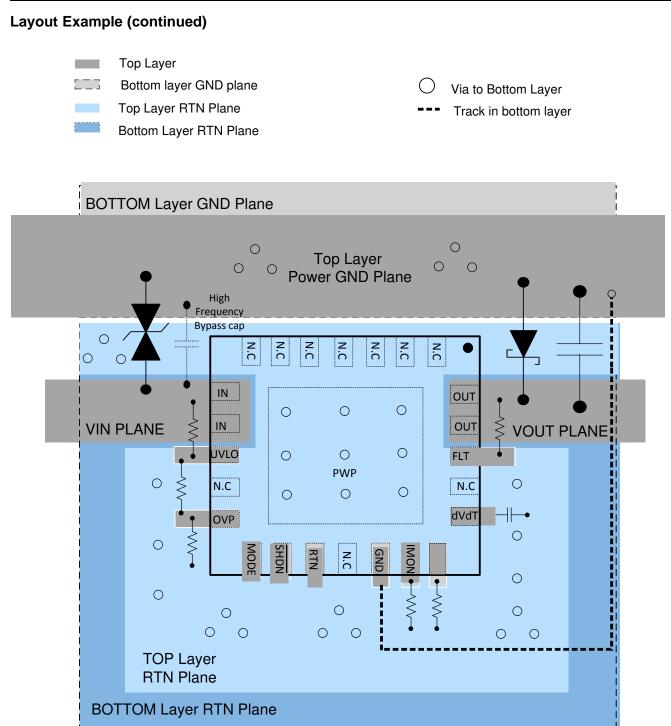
Typical PCB Layout Example With VQFN Package With a 2 Layer PCB
